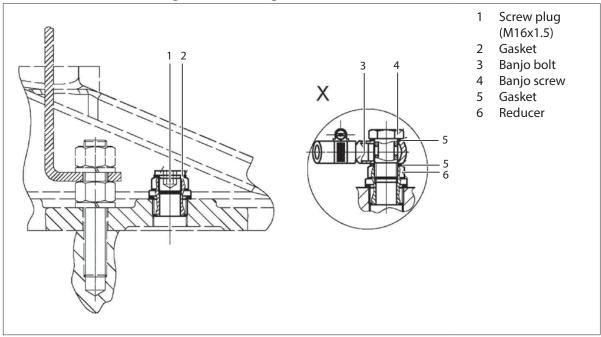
Accessory set, Part 3: Hollow screw and two gaskets
